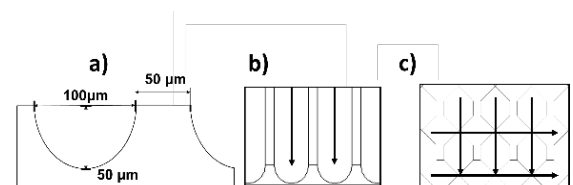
(a) Texture dimensions, (b) Channel and (c) Cross-hatch designs.
